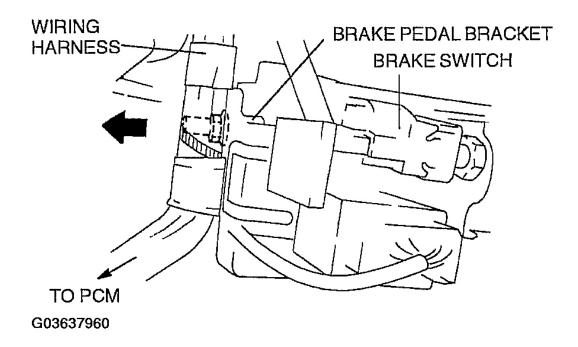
Removing PCM Wiring Harness Courtesy of MAZDA MOTORS CORP.
